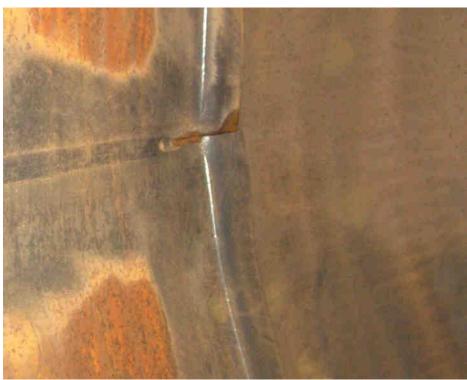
Internal image of an incomplete shell weld on a poorly welded tank.
